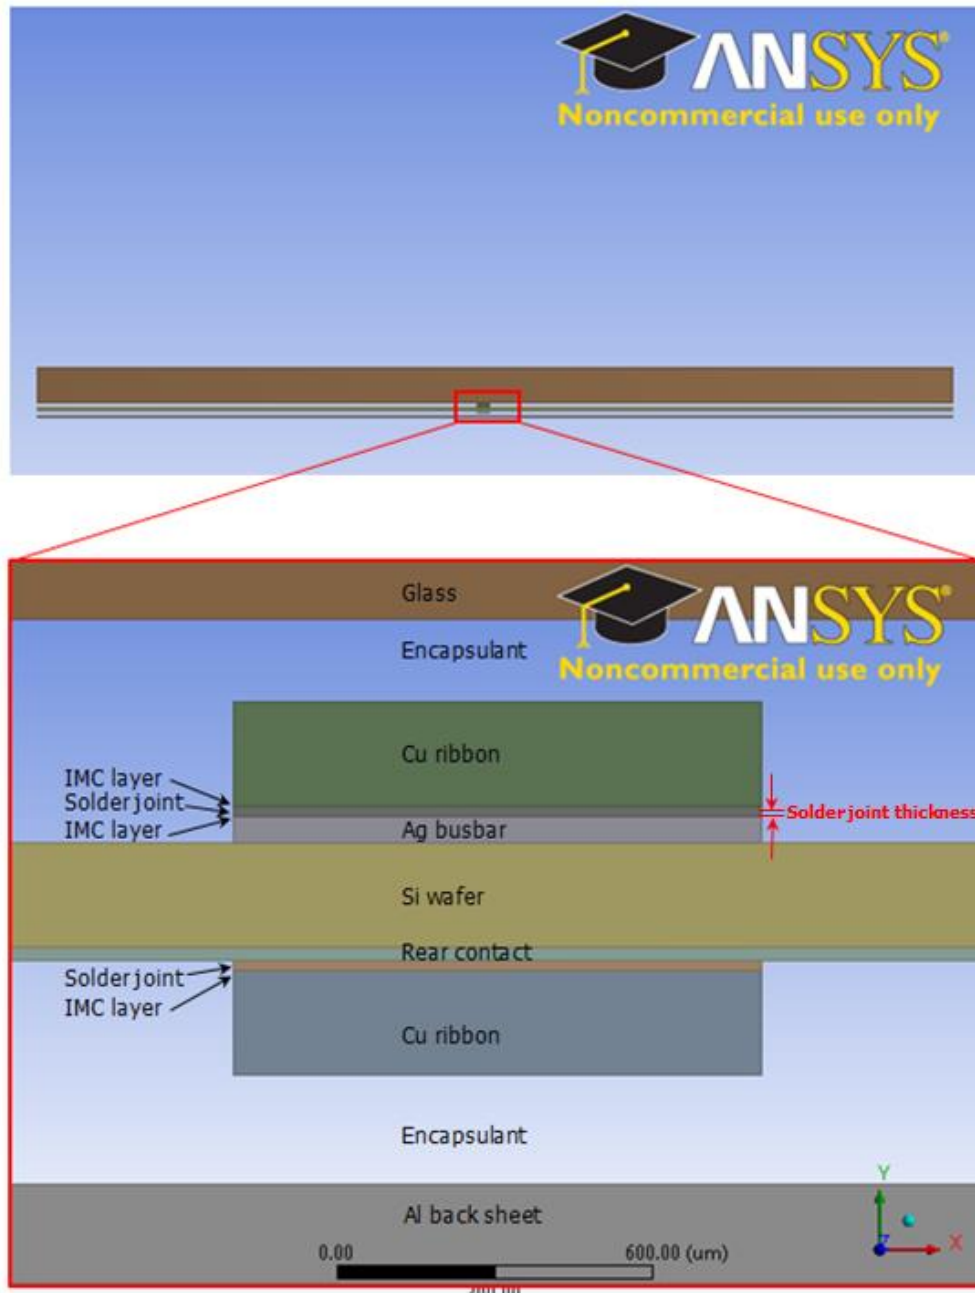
Cross-section of solar cell model showing solder joint thickness
